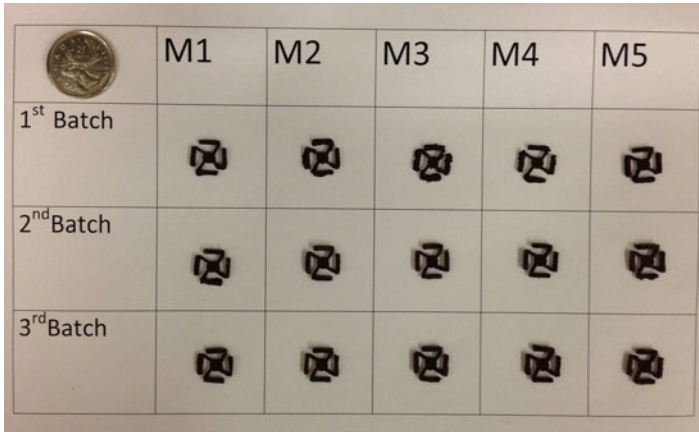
Fifteen actuating plates with five moulds and three batches
